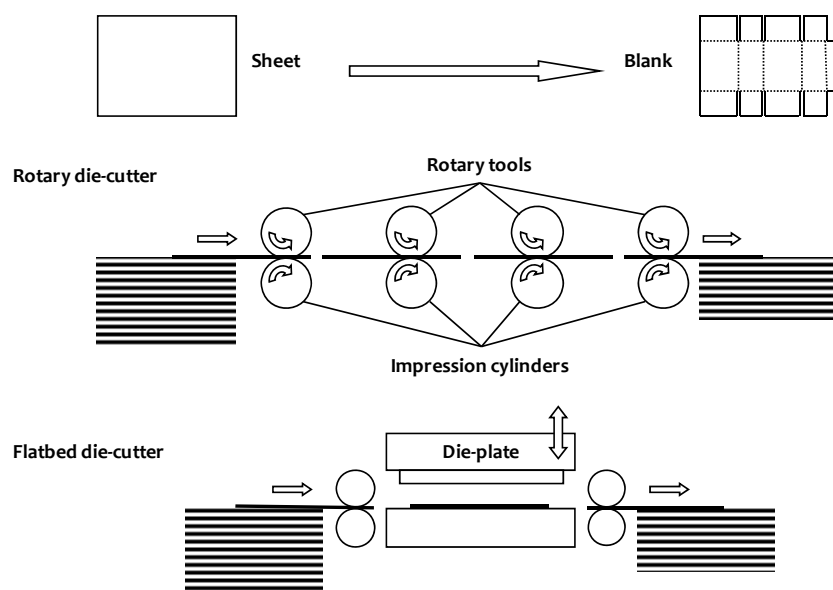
Schematics of a rotary die-cutter (top) and flatbed die-cutter (bottom)
